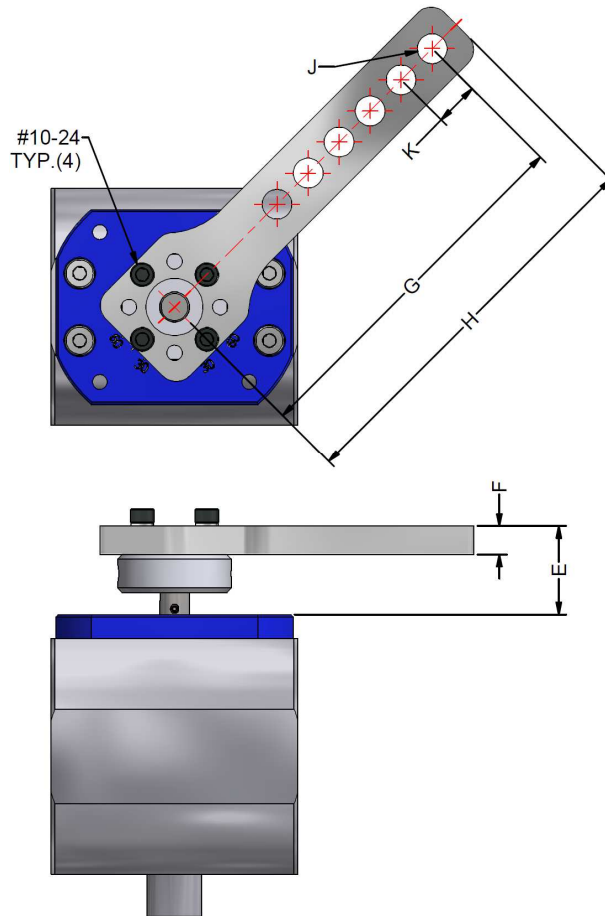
Dimensions of the CA-M10R... Crank Arm Kits
